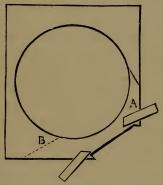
Method of "Tying" when Cutting several Thicknesses,
